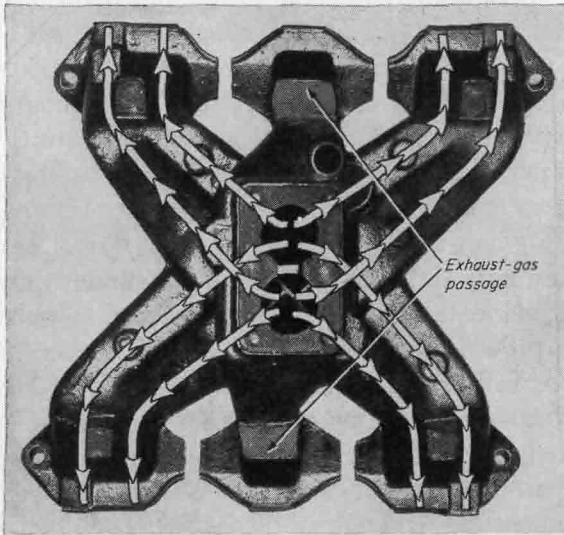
Fuel distribution through two air horns and dual-intake-manifold system of dual carburetor on V-8 engine. (Studebaker Corporation)
